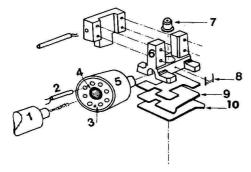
Exploded view of the LC-MS interface. 1 = DLI probe end (Vespel) with 2-μm nickel diaphragm; 2 = cartridge heater; 3 = copper heater housing; 4 = copper desolvation chamber; 5 = Macor insulator; 6 = ion source block; 7 = repeller assembly; 8 = rhenium filament; 9 = focusing lens; 10 = ion energy lens.
